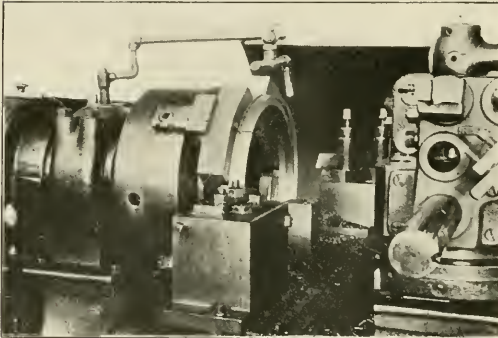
Cutting First Ring from Tub and Facing Second Ring
